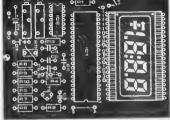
The track pattern and component layout of the printed circuit board. The size and layout of the board allows the completed circuit to be inserted into a ready made plastic case by Vero. Ensure the correct wire links are in place for the 7106 or 7116.
